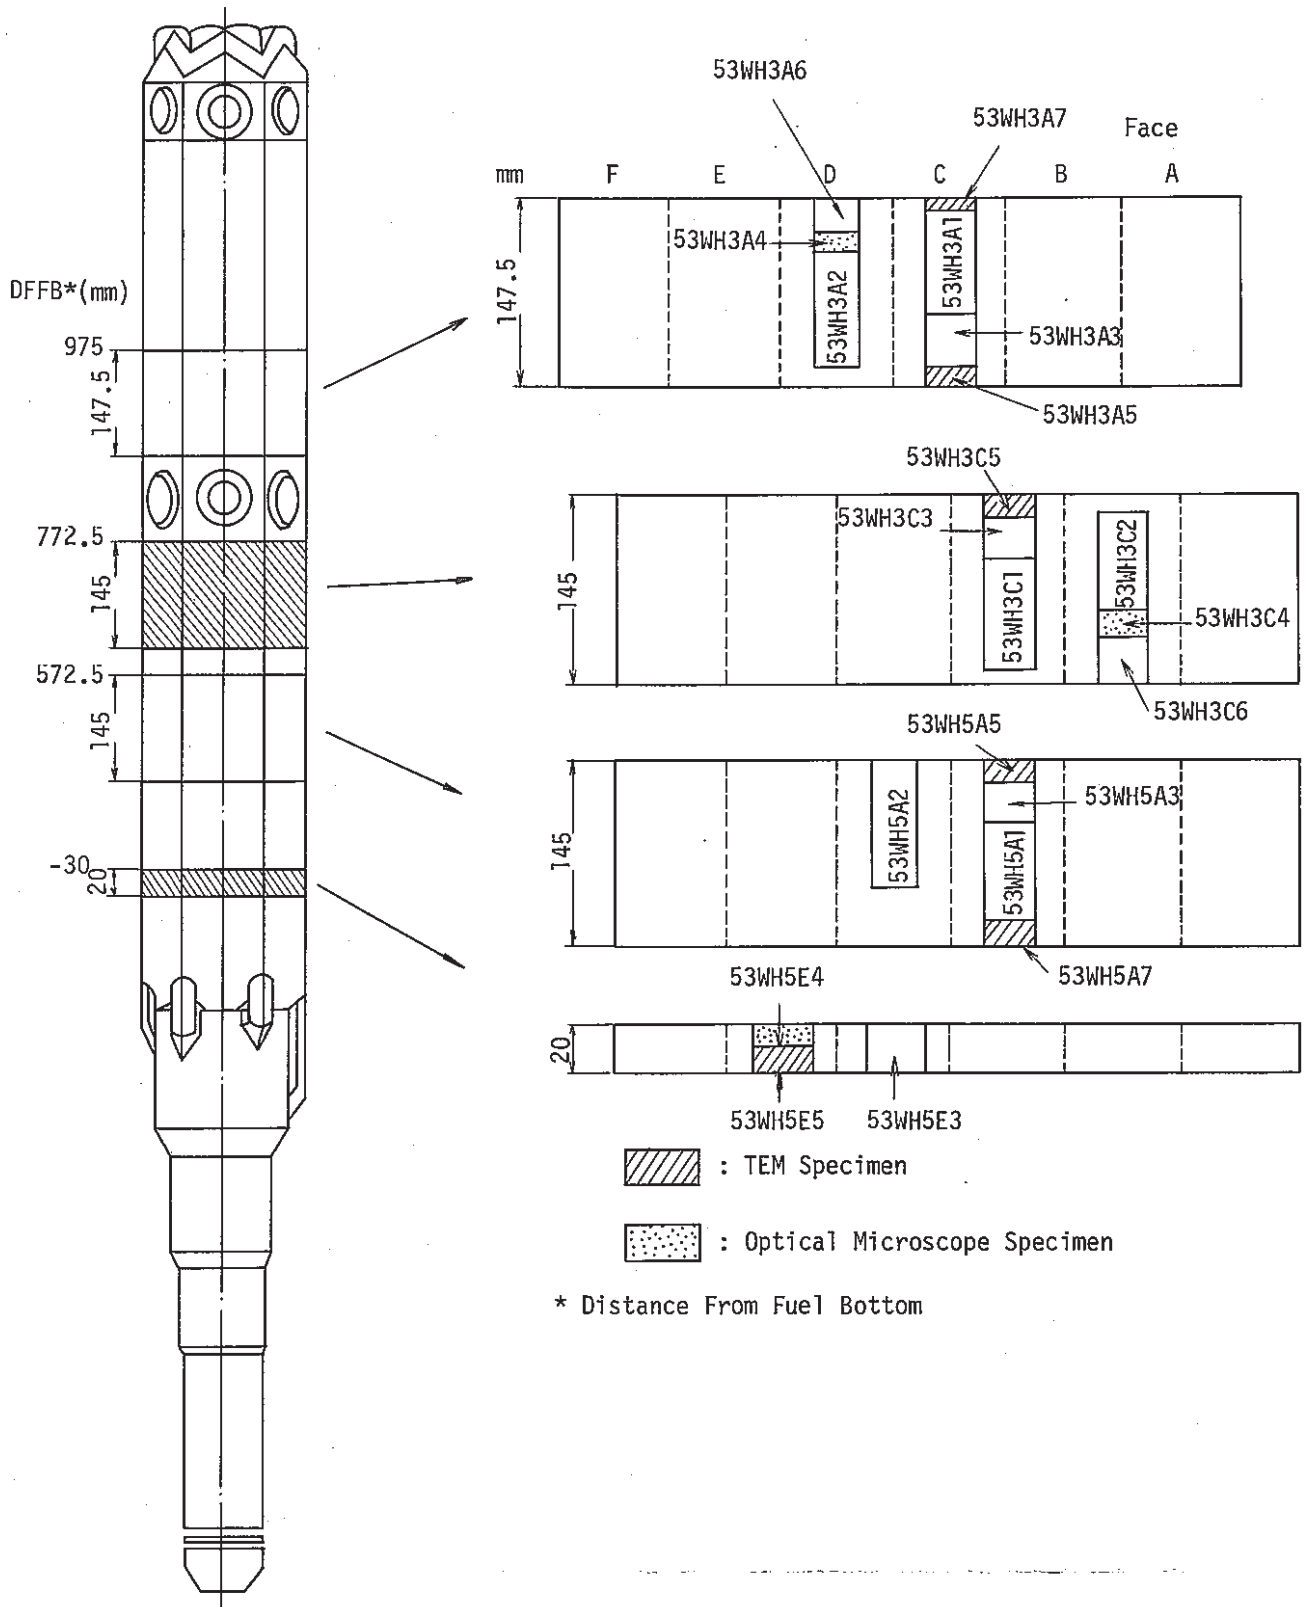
Schematic Diagram of Wrapper Tube Specimen Position for Transmission Electron Microscopy
